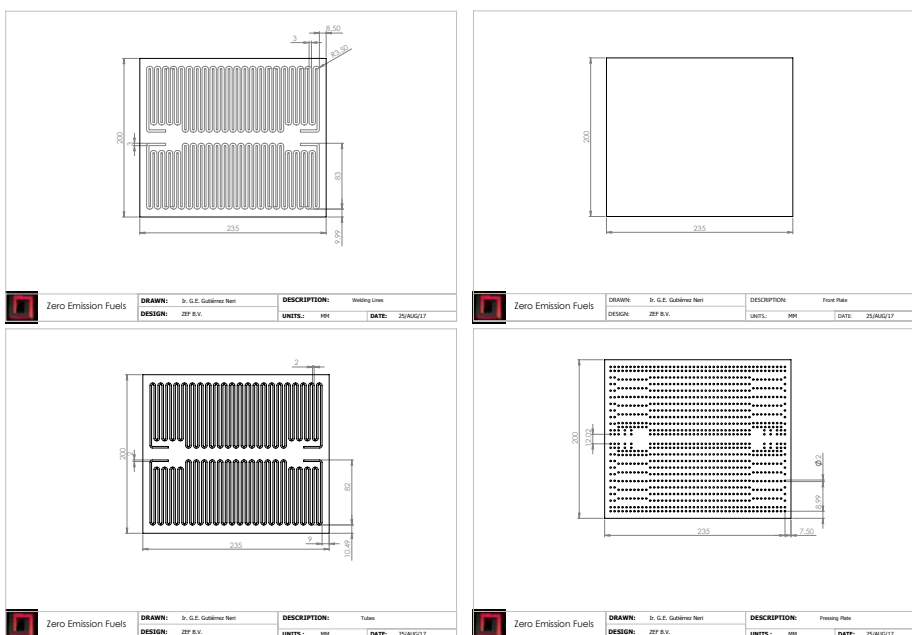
Technical drawings send for laser welding the first backbone prototype
